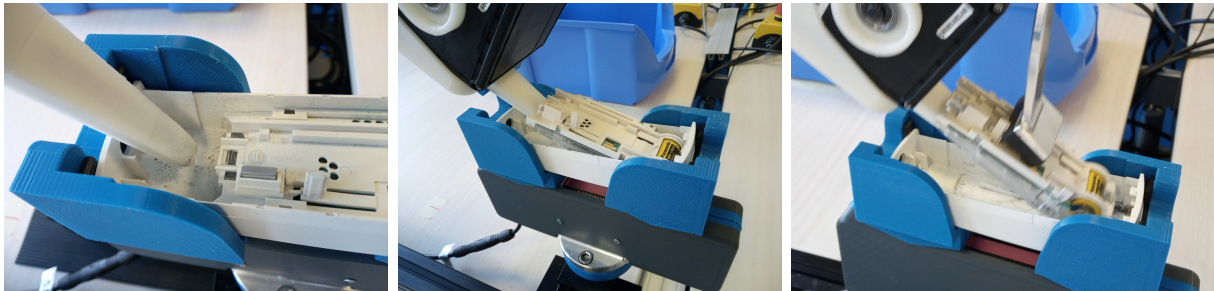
Levering sequence to remove the inner part of the heat cost allocator: 1. approach motion, 2. inner part detachment using the roll movement, and 3. grasping and picking up the HCA.
